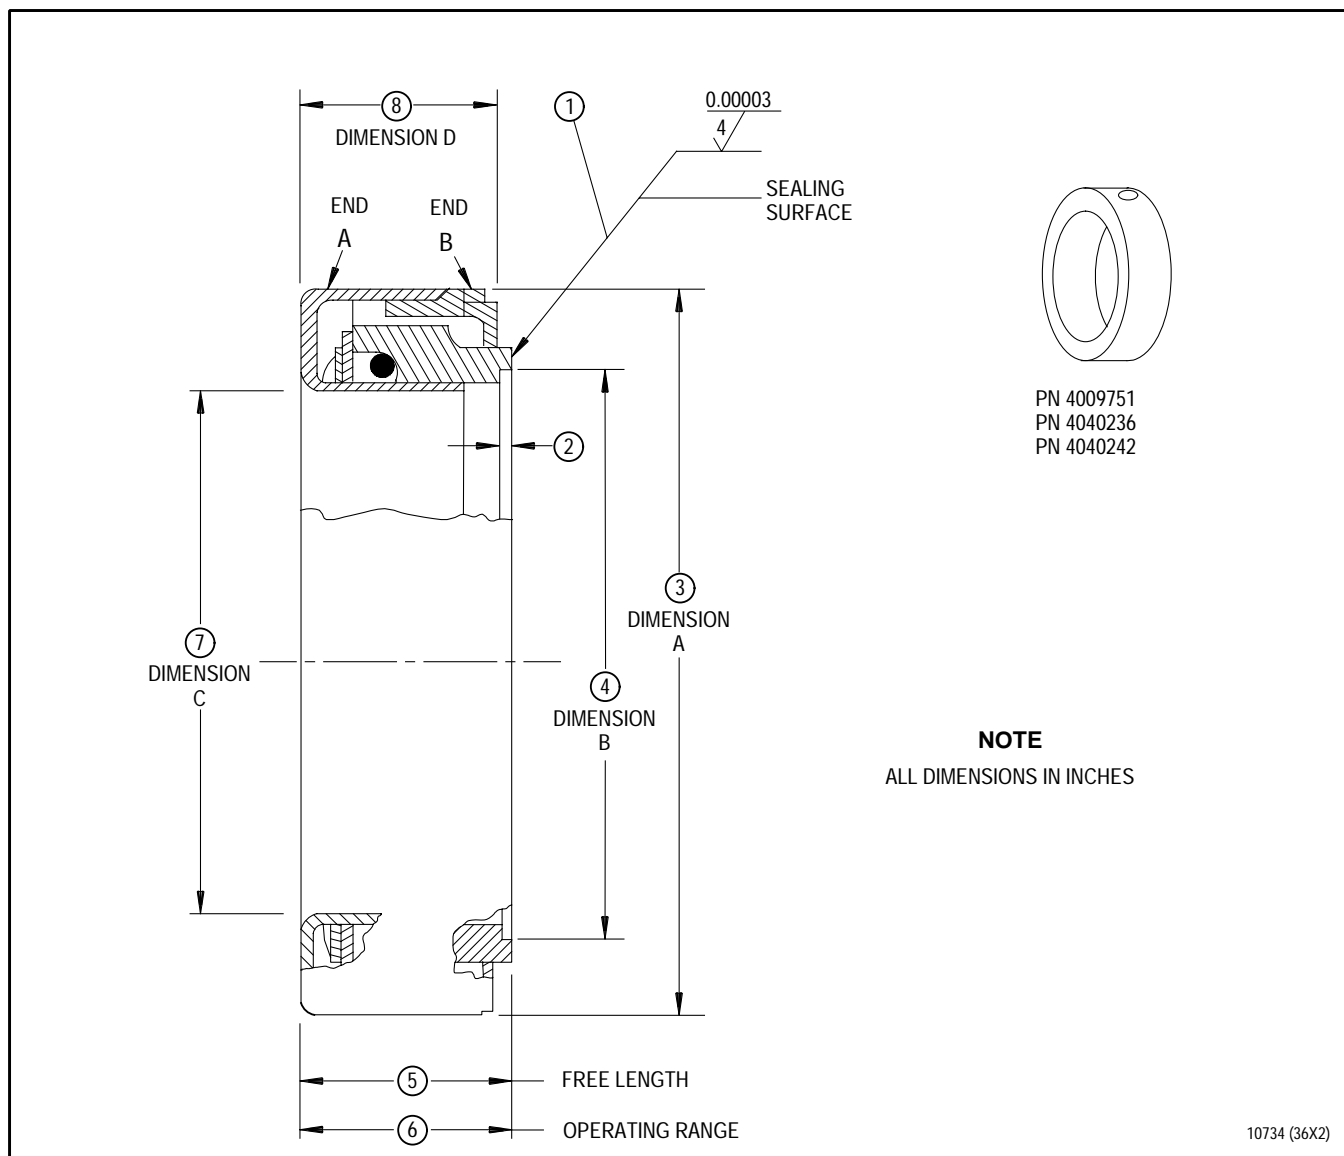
Gearbox Seal Assemblies (PN 4009751, 4040236 and 4040242) - Inspection
